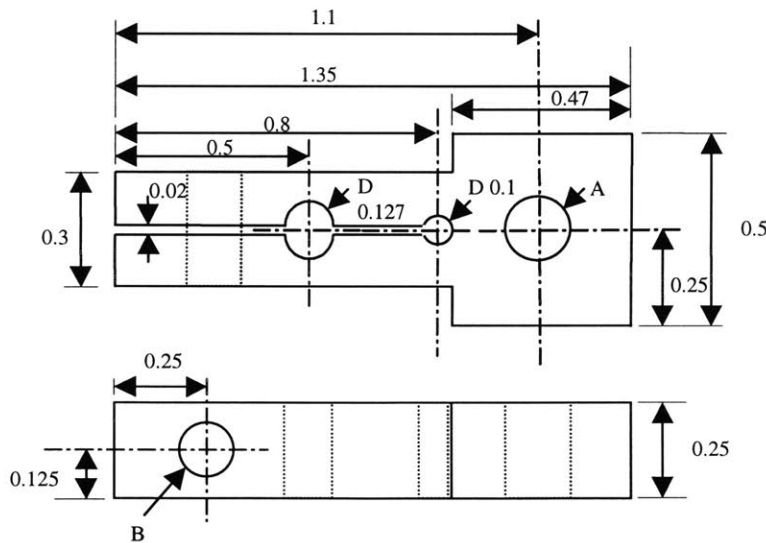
Drawing of the Brass connector used to connect a wire from the SCR to a Brass tube that is brazed to a heater lead. Holes A and B in the drawing are clearance holes for 8-32 and 6-32 screws respectively.
